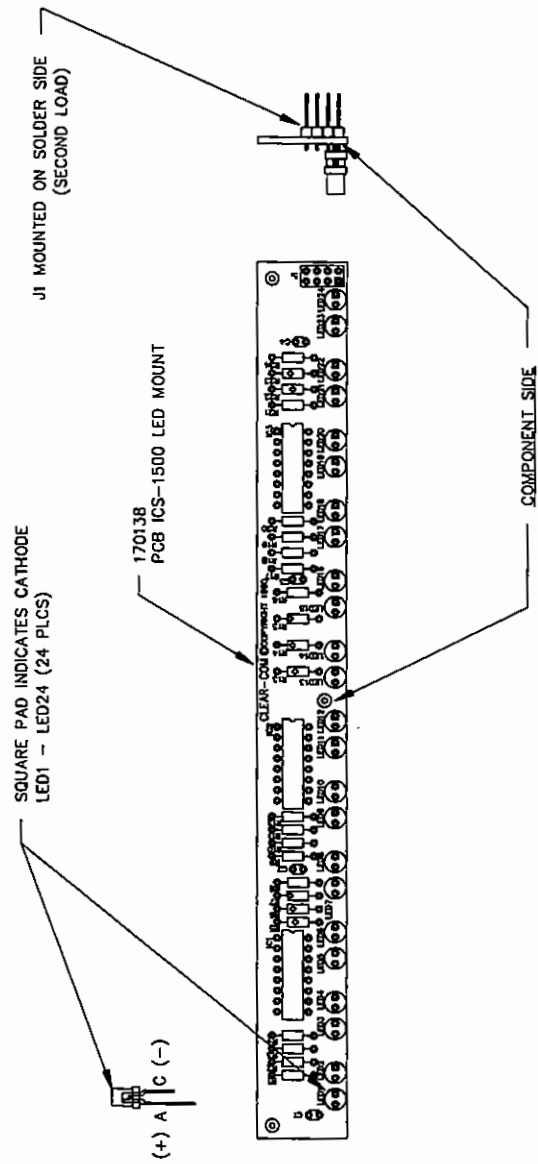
Assembly Drawing - ICS-1502 LED Front Panel PCB Rev. A
